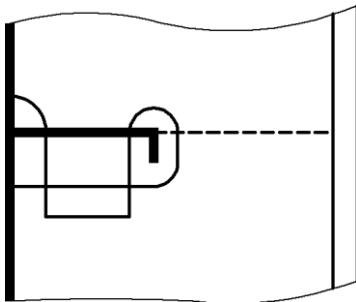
End connection of ordinary stiffener: Collar plate
